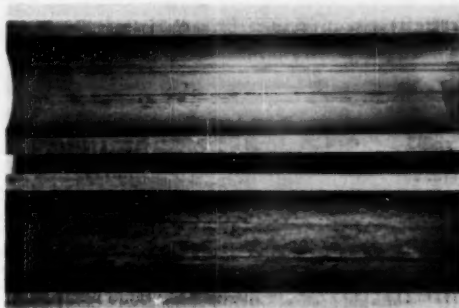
COMPARATIVE APPEARANCE OF SEAMS AND DRAW MARKS ON INNER SURFACE (Lower sections of seams are delineated by residual moisture in crevices.)
